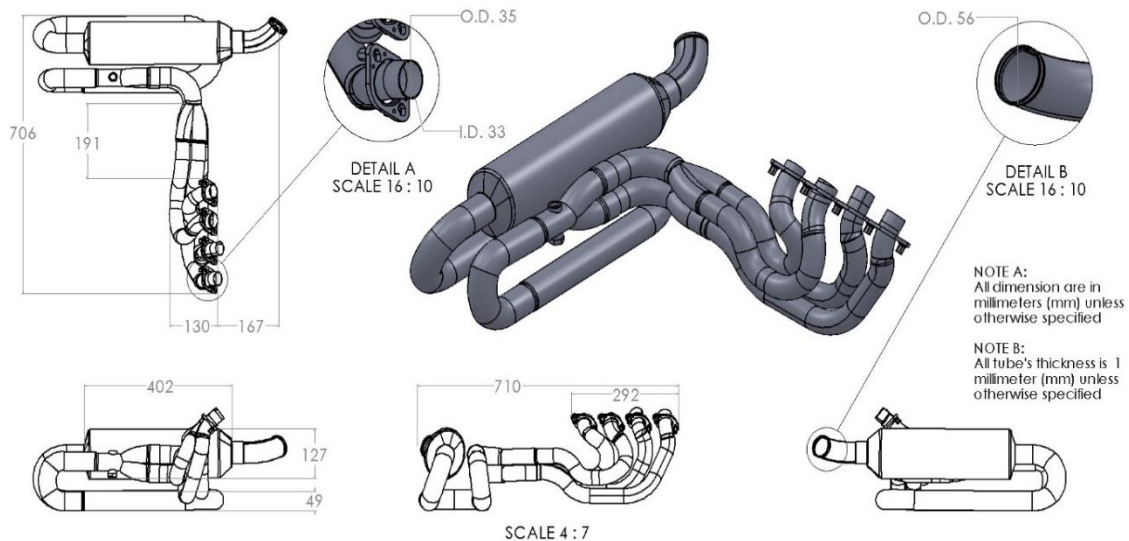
Honda CBR 600RR (PC 37) current engine exhaust system dimensions without perforated pipe inside (*PPiP*) the muffler.
